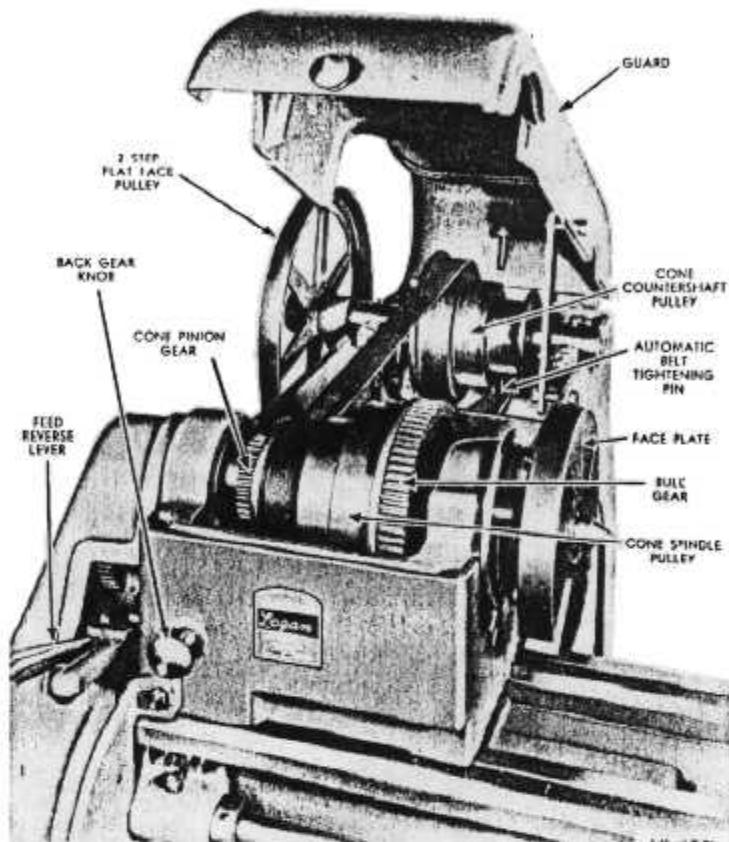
HEADSTOCK AND COUNTERSHAFT
